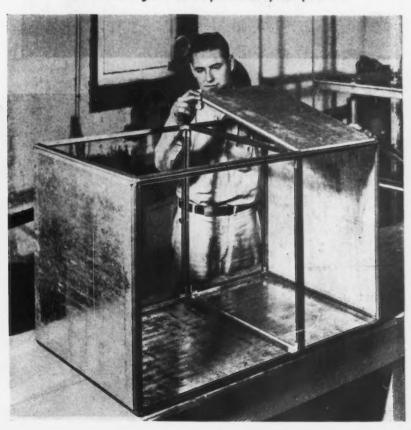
Decorative molding is snapped in place to give completed Struc-Lok assembly machine-finished appearance.
